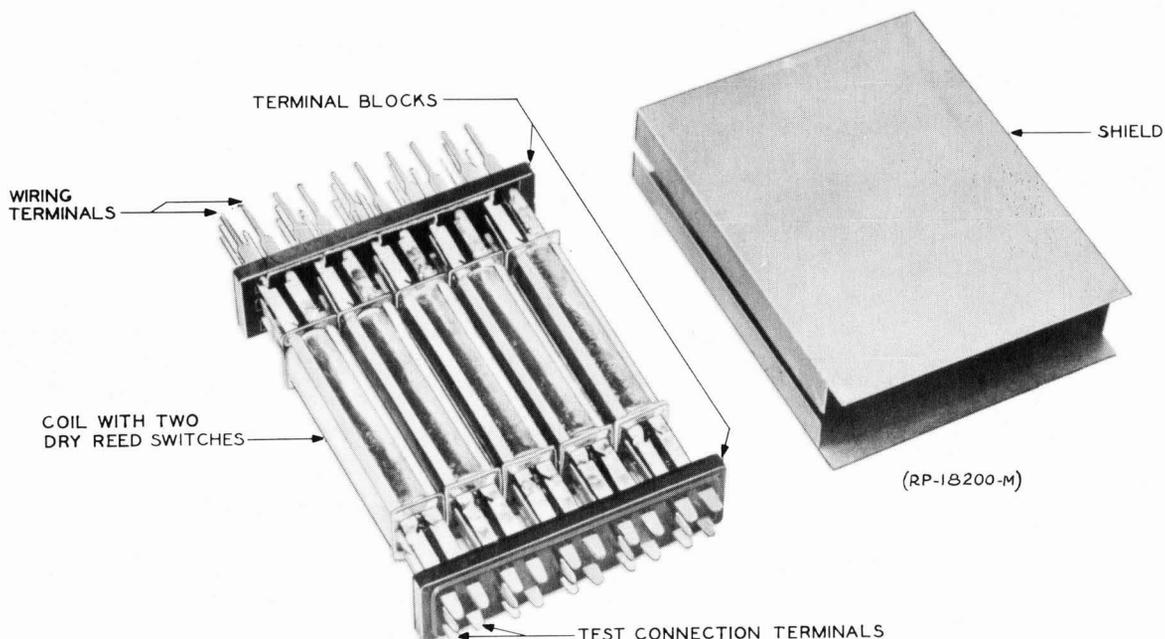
293 TYPE RELAY WITH COVER AND COVER SHIELD REMOVED
